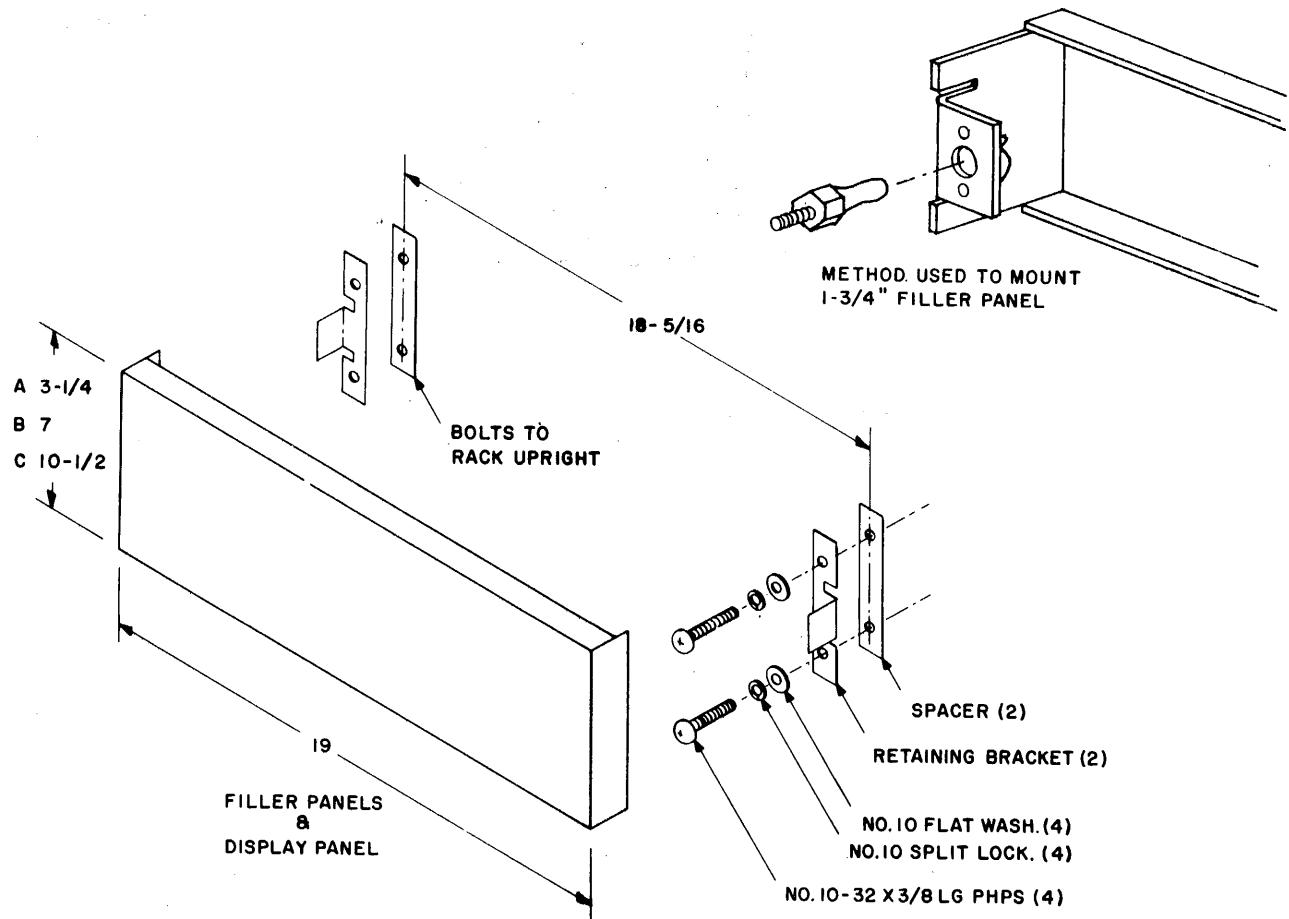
Typical Mounting Configuration for Display and Filler Panels
